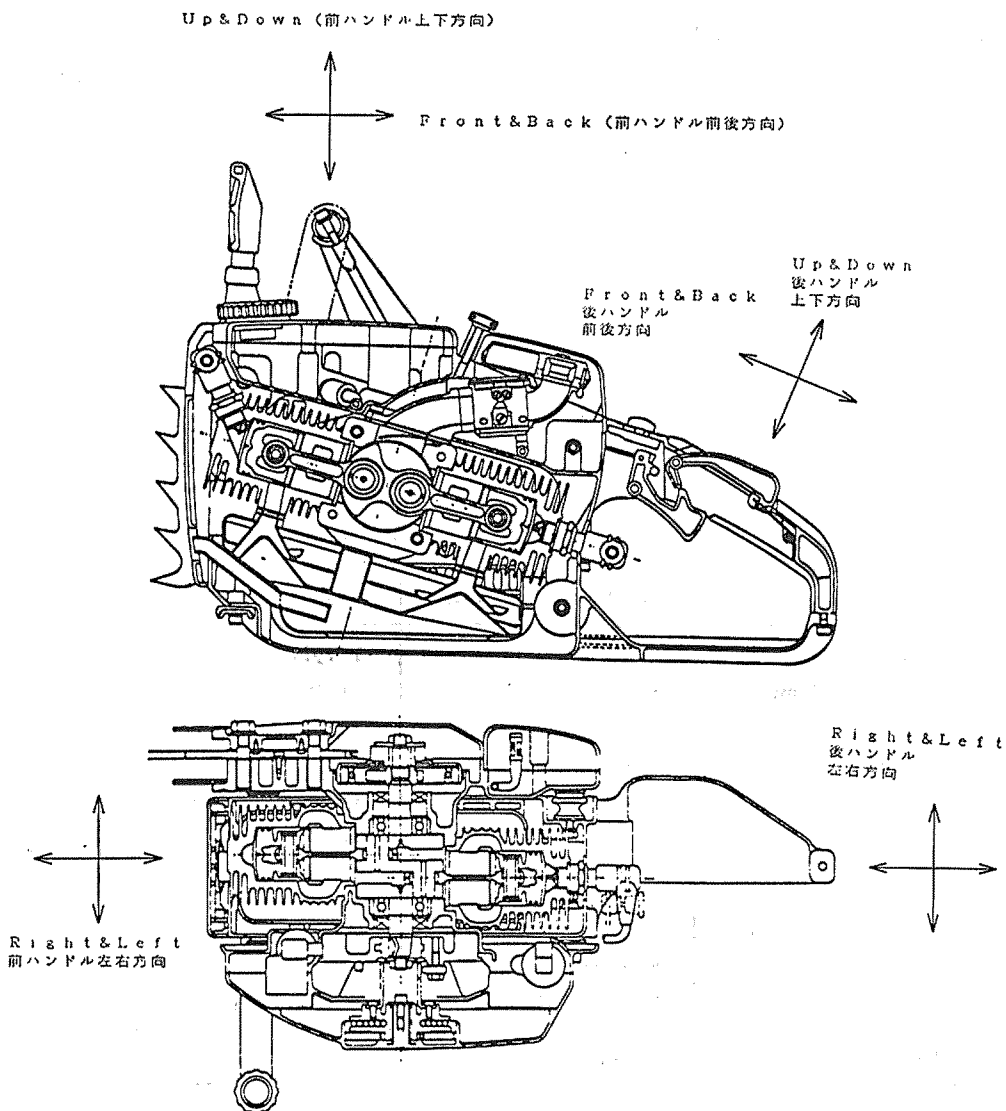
Side & Up section view of TWIN CHAINSAW (林業機械ハンドブックより)³⁾
